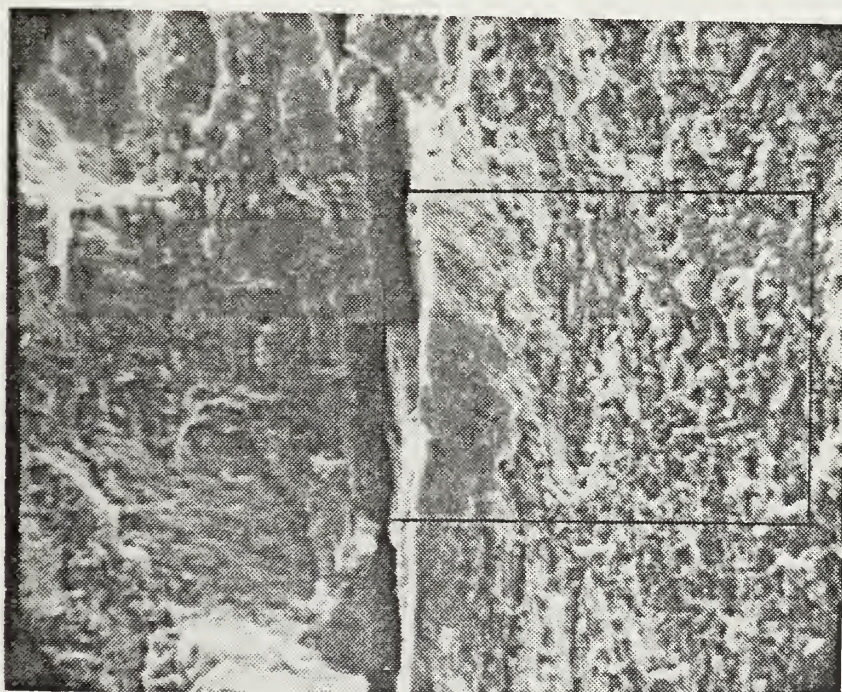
Fractograph on the boundary between the fatigue zone and fast fracture zone in the same specimen of Fig. 50. Quasicleavage with deep secondary cracks is evident. X1000.
